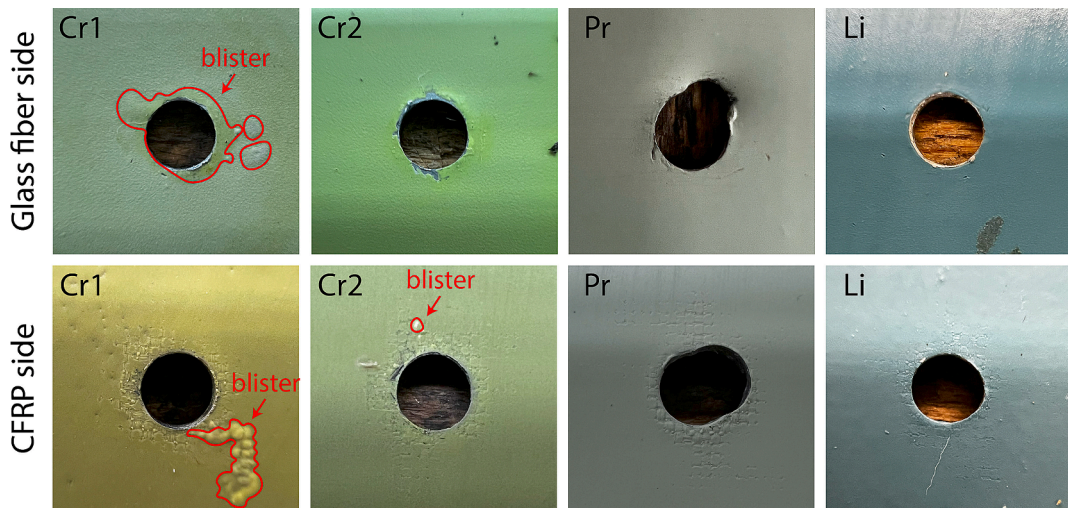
Overview of lap-joint facing areas around stainless-steel rivets between CFRP and aluminium panels with different coating systems after outdoor exposure.
